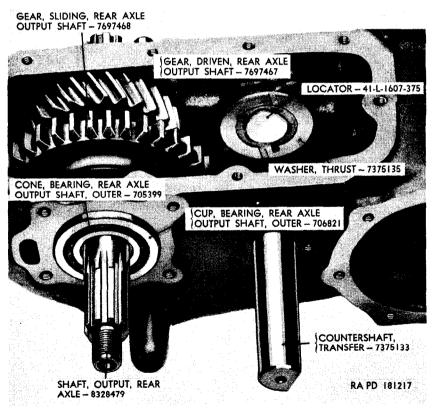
Positioning countershaft gear thrust washer with locator-41-L-1607-375.
